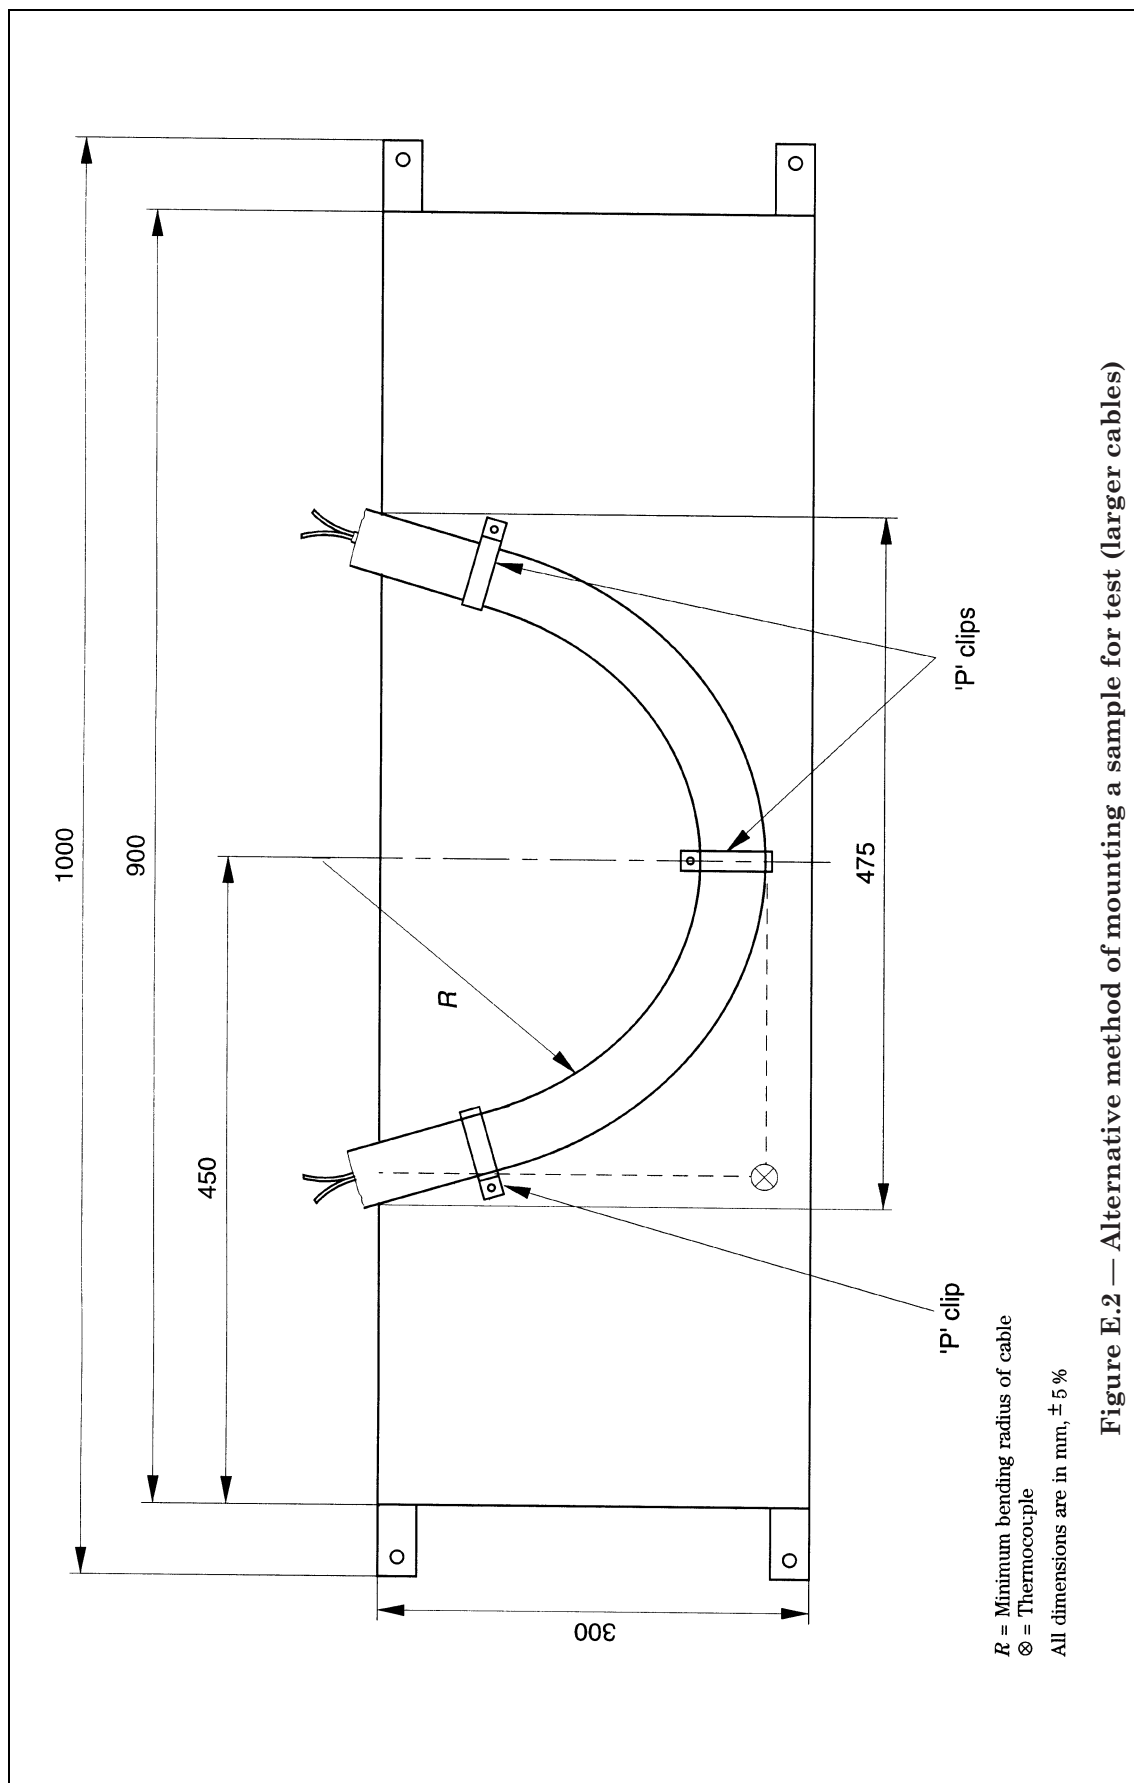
Alternative method of mounting a sample for test (larger cables)
